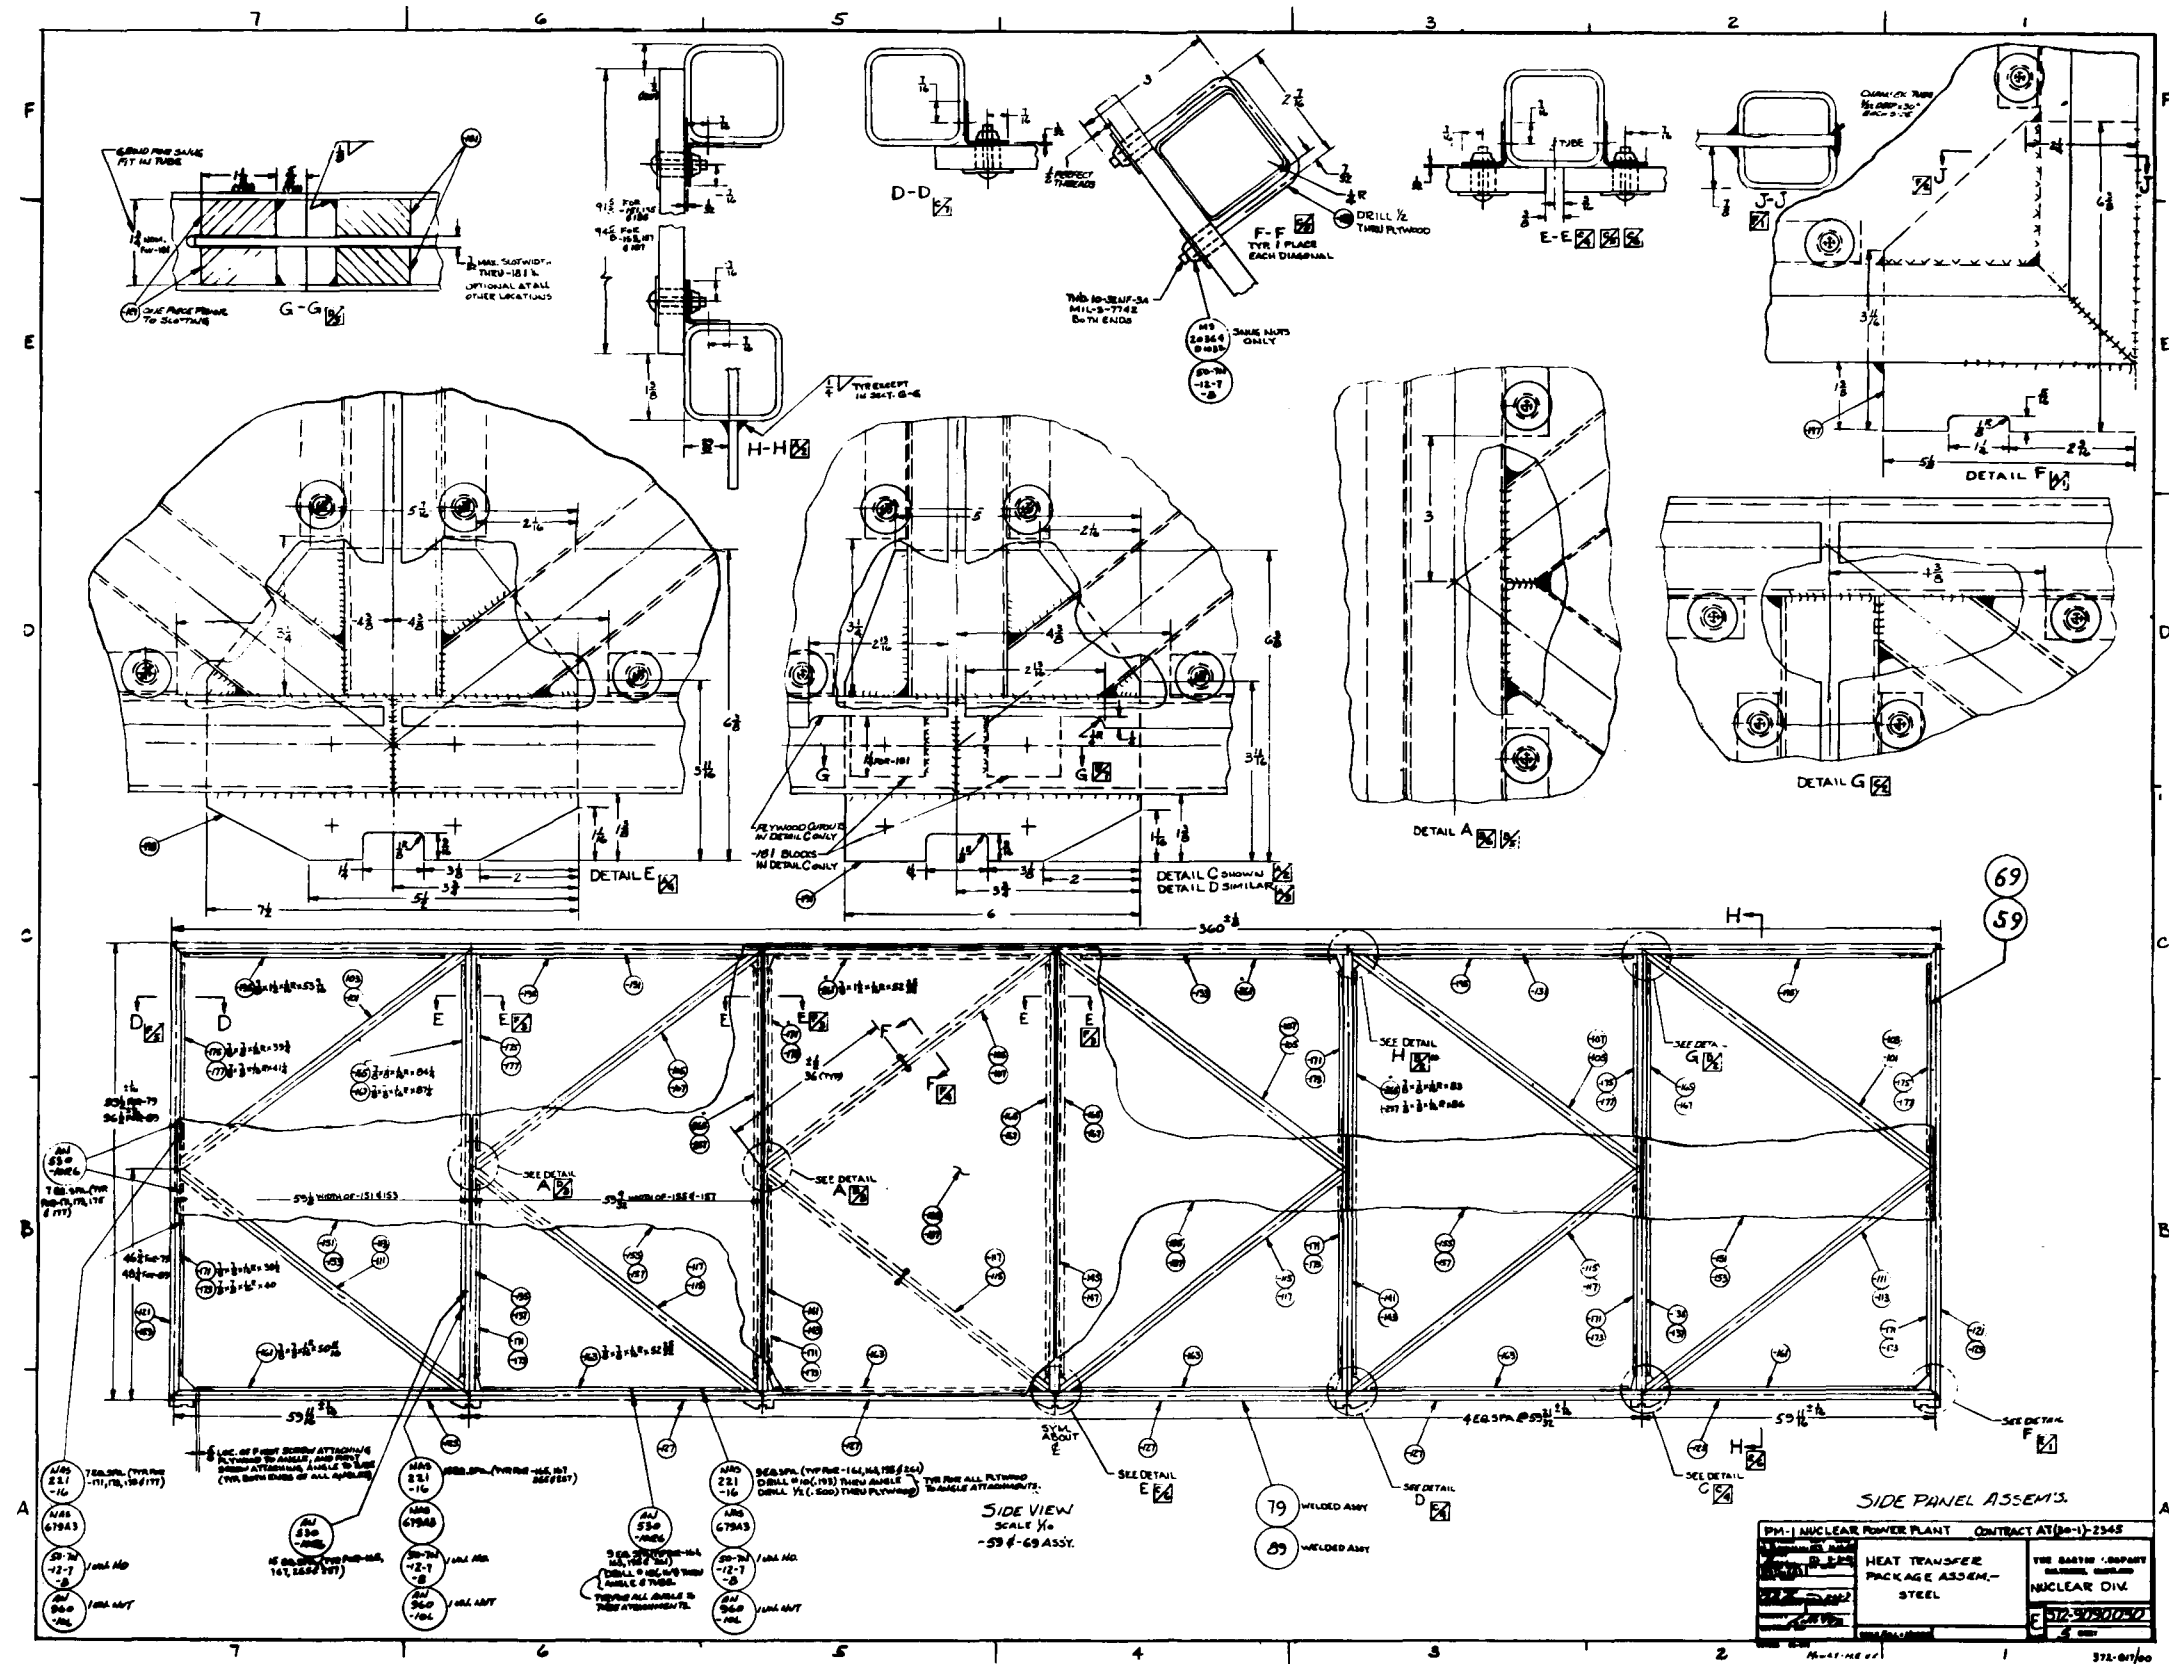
Heat Transfer Package Assembly Drawing (Side Panel Assemblies)
